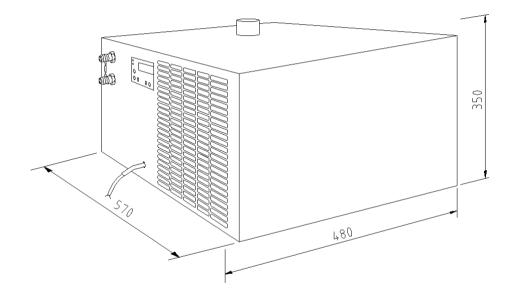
Dimensional drawing IK-V 07/C in "mm"
